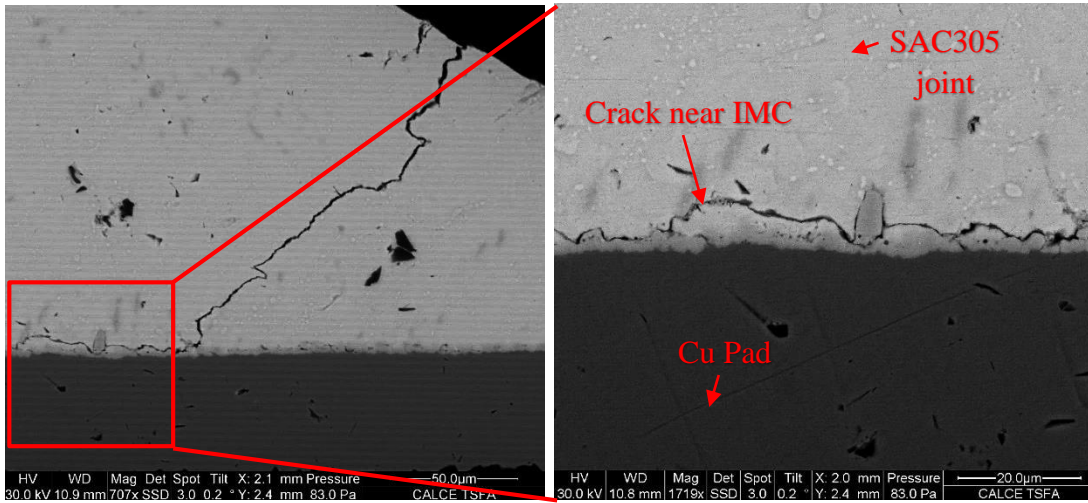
Crack through copper pad interfacial IMC and bulk of solder fillet (Aged 500 hrs @ 125°C + 5 yrs RT)
